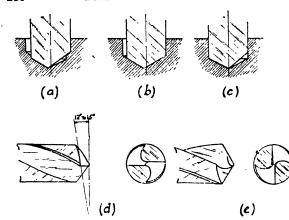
Points in connection with drill grinding (a) and (b) Drill ground with unequal angles, tending to cut a hole larger than own diameter. (c) One lip of drill alone cutting due to unequal grinding. (d) Showing angle of rake with correctly ground drill. (e) Thinning of point.
